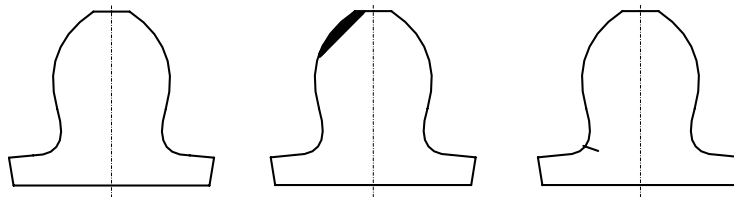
Gear conditions tested: (a) worn gear, (b) chipped gear, (c) cracked gear.
